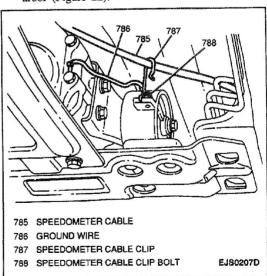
Speedometer Cable Clip at Torque Stopper Housing
